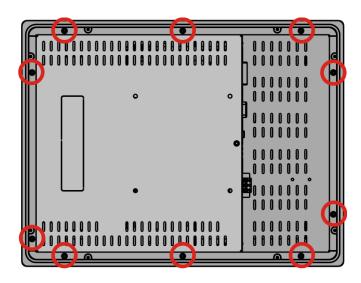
SRM-121 Frame Rear View (10 rackmount kit screw holes)
